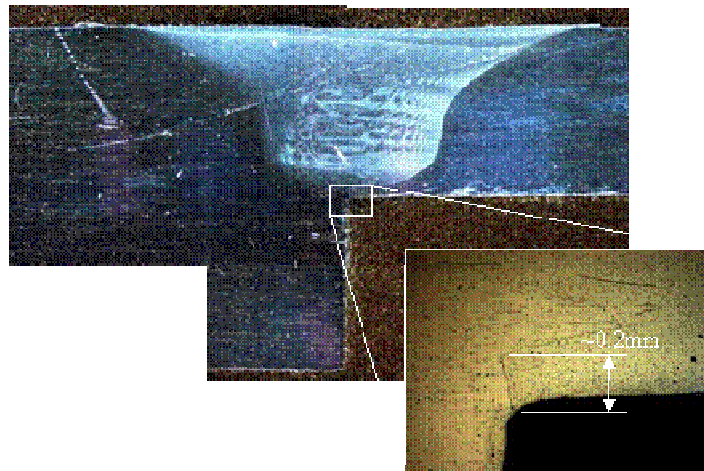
Cross-section of tailored-blank weld produced using square-edged anvil
